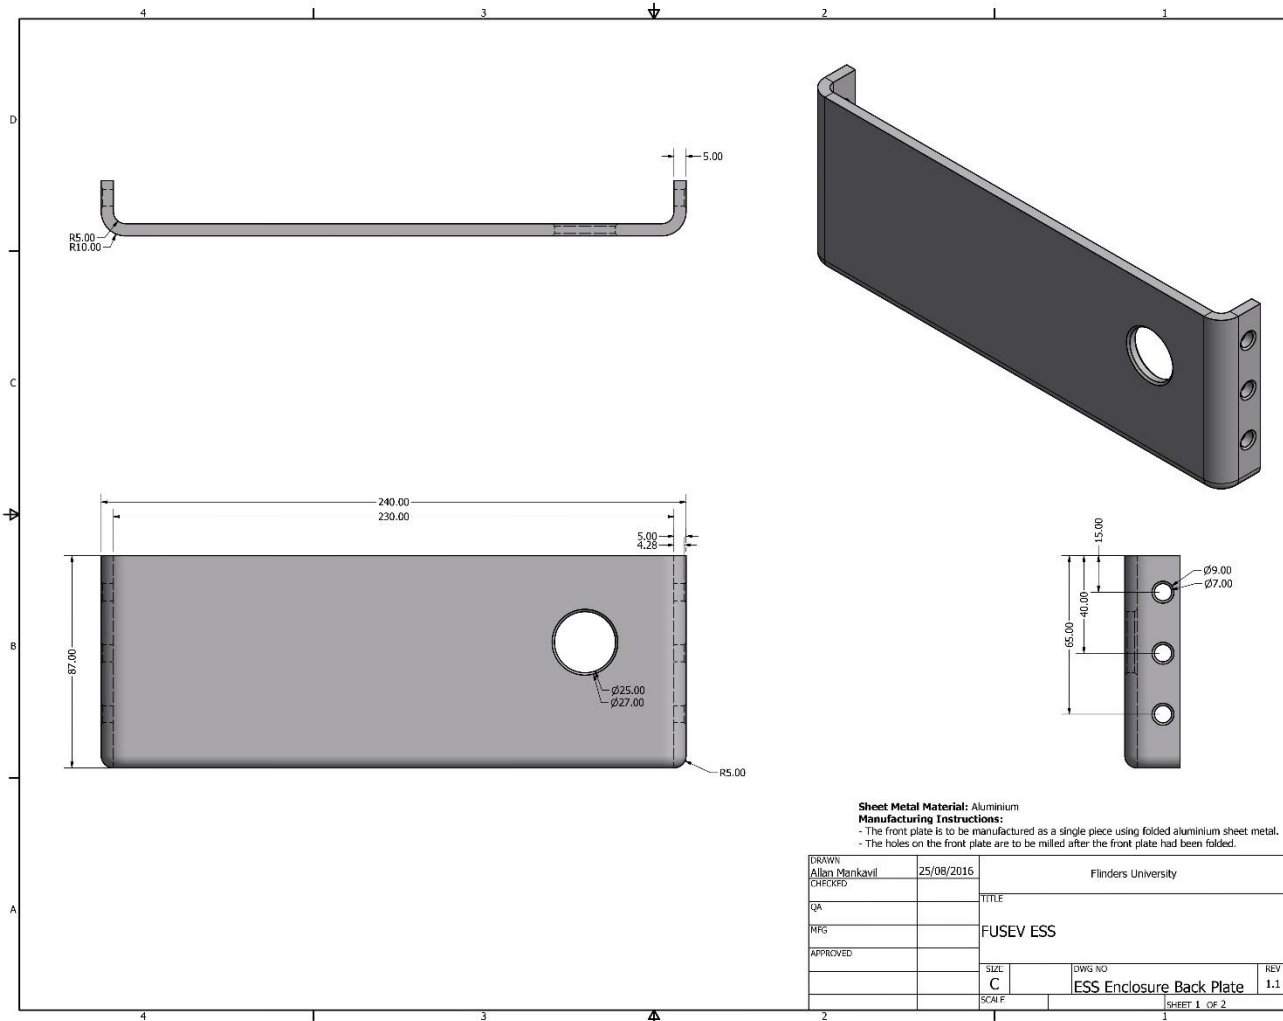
The mechanical drawing of the ESS Enclosure's folded Rear Plate.
